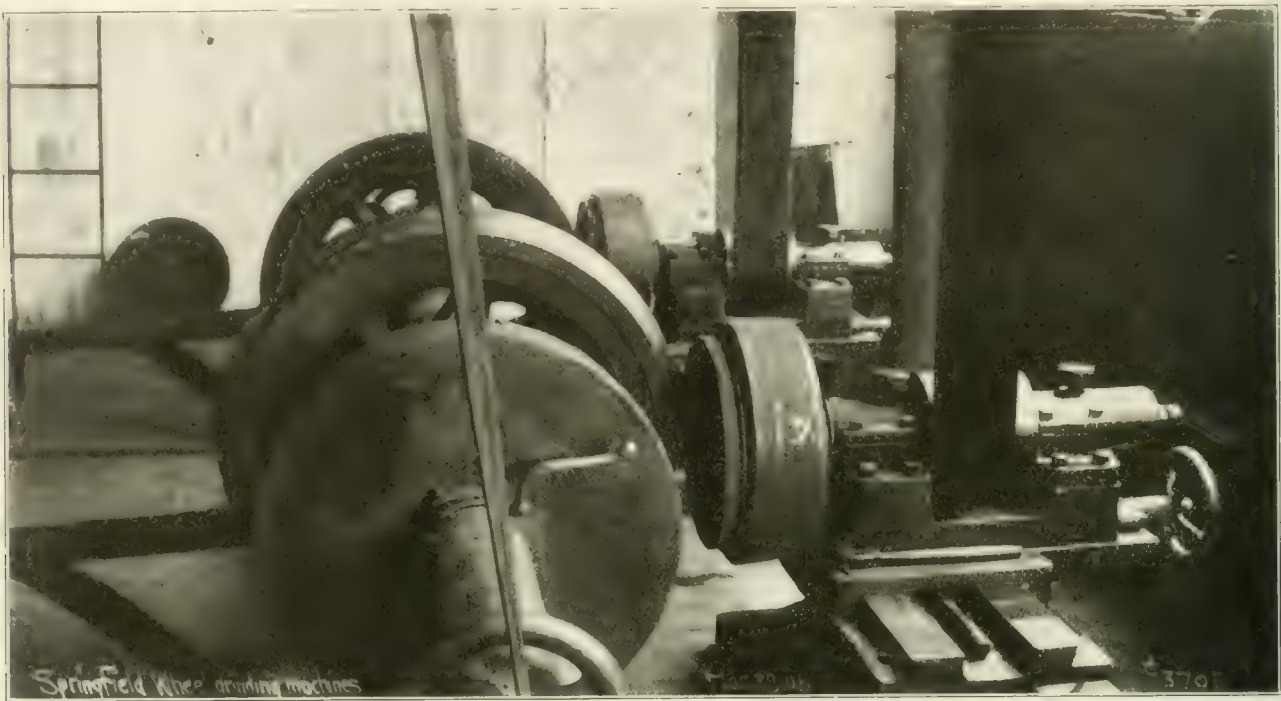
SPRINGFIELD WHEEL GRINDING MACHINE
